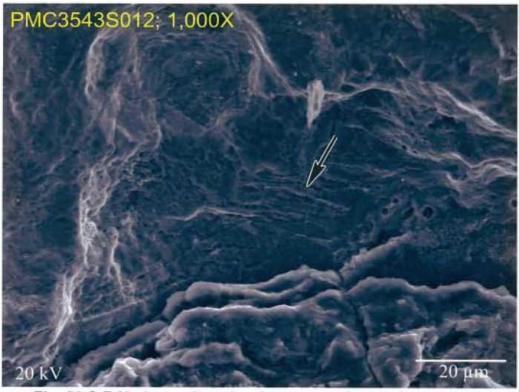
S.E.M photo of eye bar fracture surface at fracture origin, in fig. 45. 1000X.
